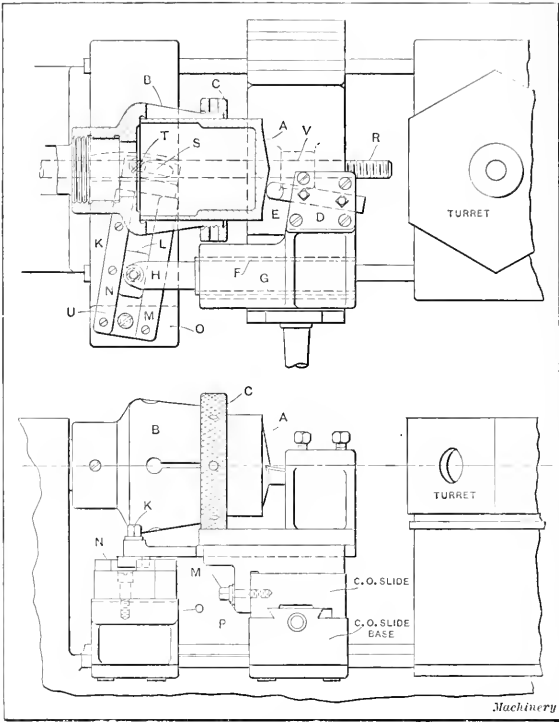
Turret Lathe Taper Attachment for machining the End of an Automobile Engine Piston
